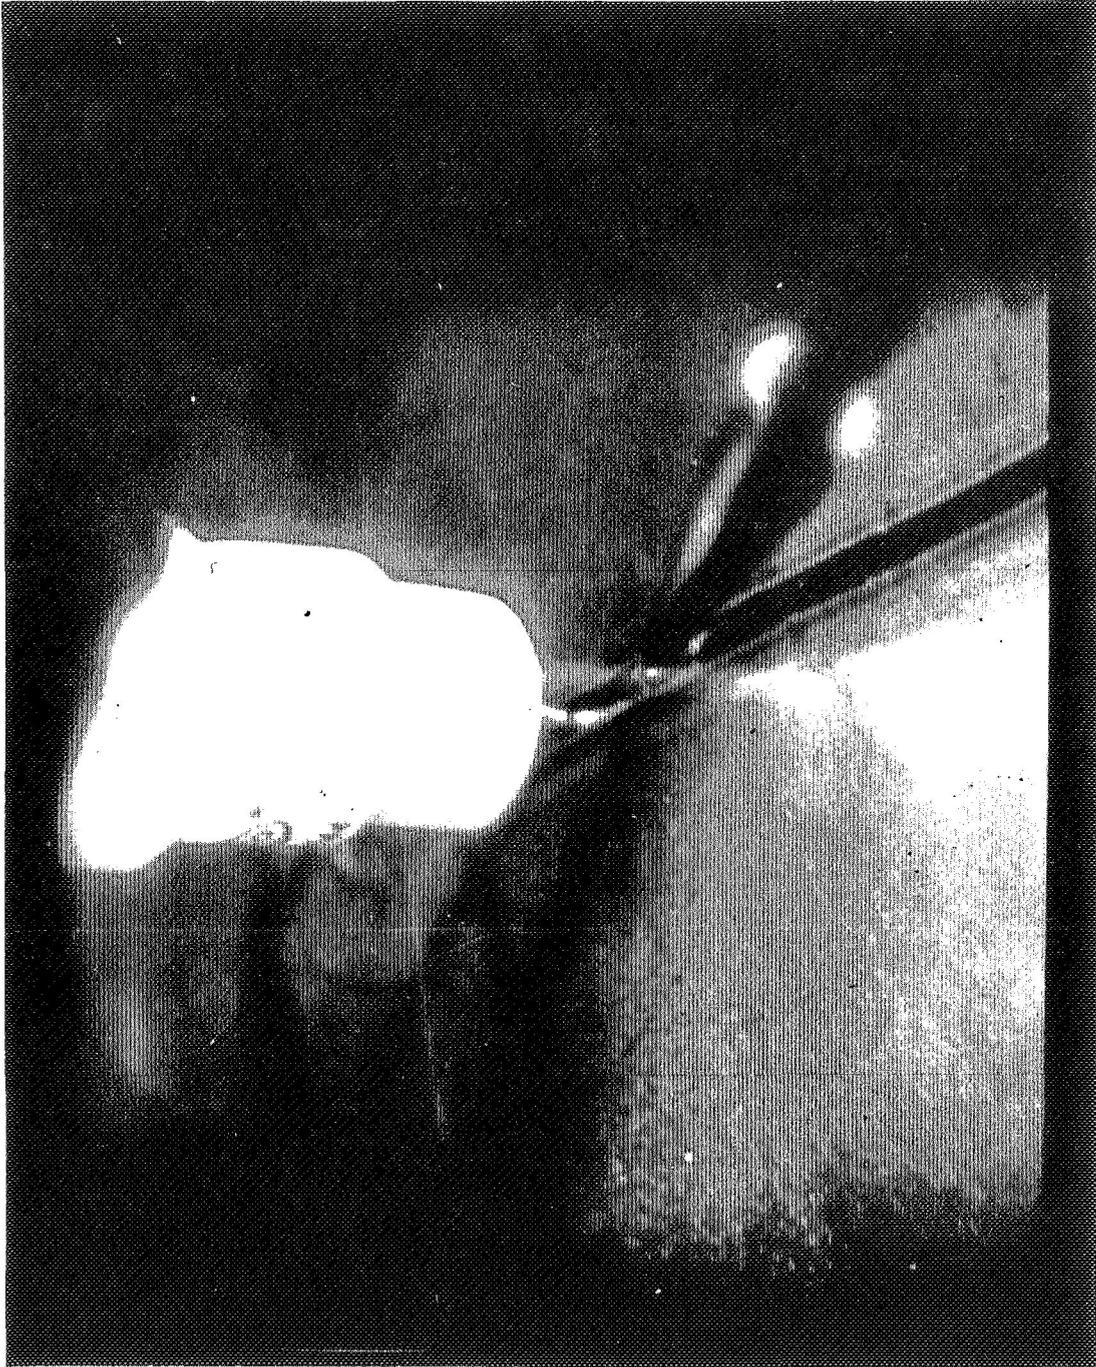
Typical Vision With The Arc Off, Not Welding
